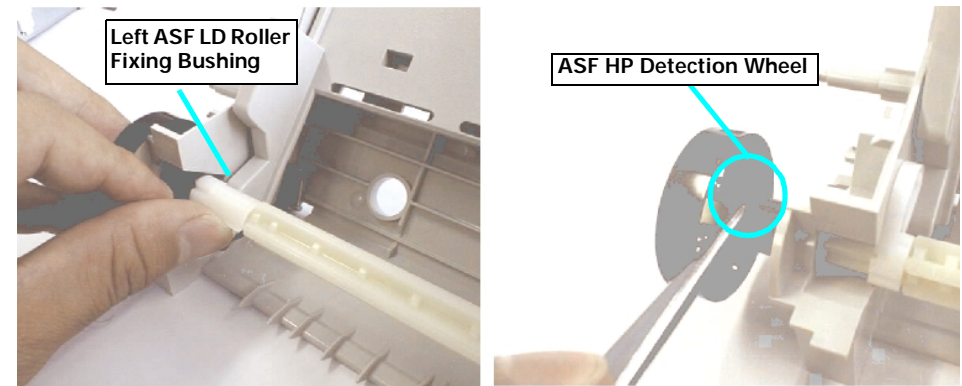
ASF LD Roller Fixing Bushing and ASF HP Detection Wheel
